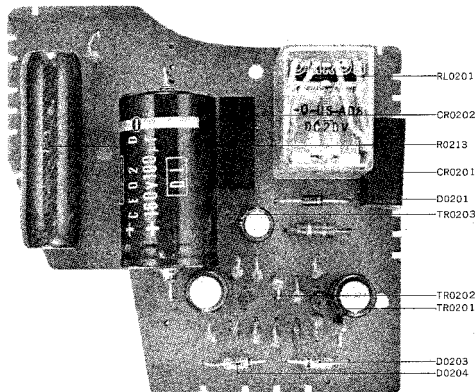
PHOTO OF TENSION RELAY P.C. BOARD (MR-558)
